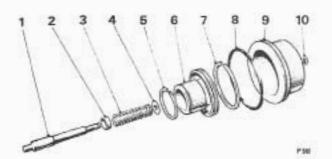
REAR SERVO AND ACCUMULATOR-EXPLODED
